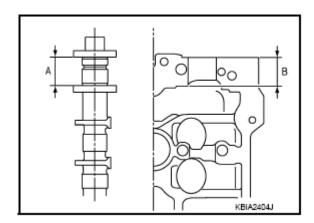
Identifying Camshaft (EXH) Journal And Cylinder Head Bearing Dimension Courtesy of NISSAN NORTH AMERICA, INC.
